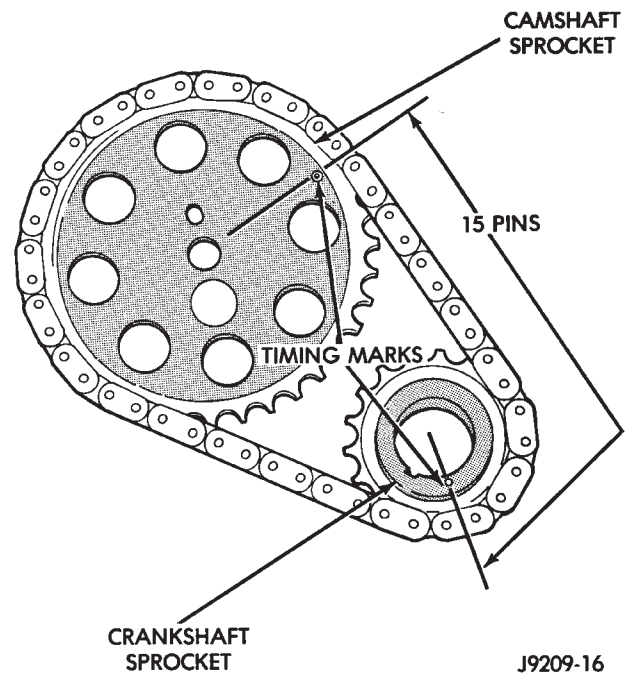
Verify Crankshaft—Camshaft Installation—Typical
